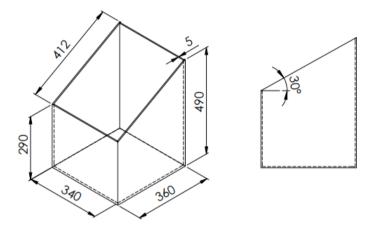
The Dimension of Basic Cool Roof Model in Millimeter.
